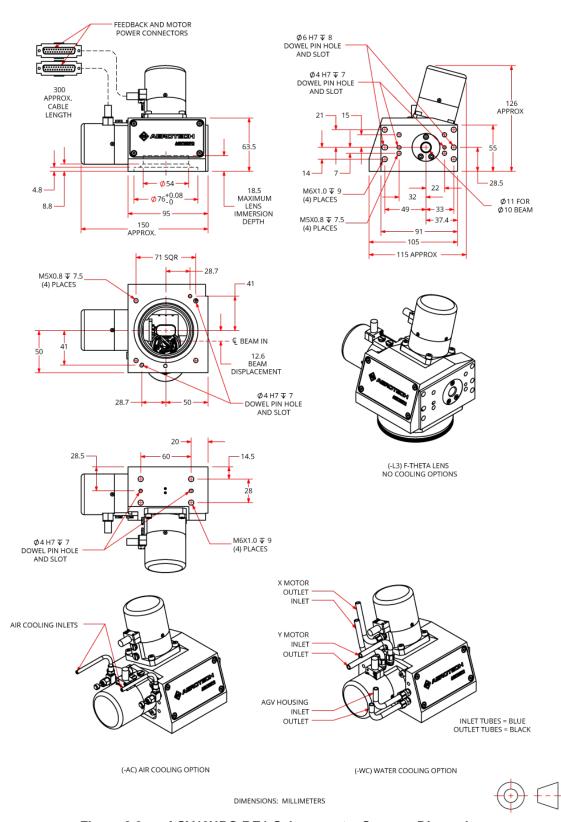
AGV10HPO-BE1 Galvanometer Scanner Dimensions
